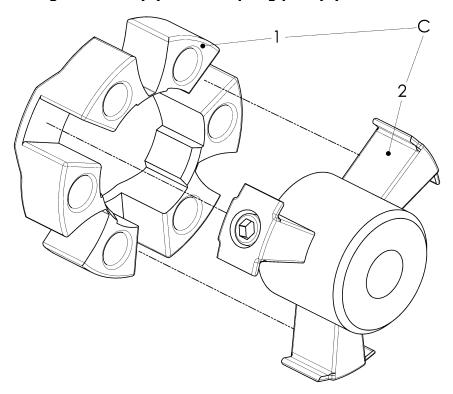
Preparing the pre-mounted assembly (C) for mounting the claws
